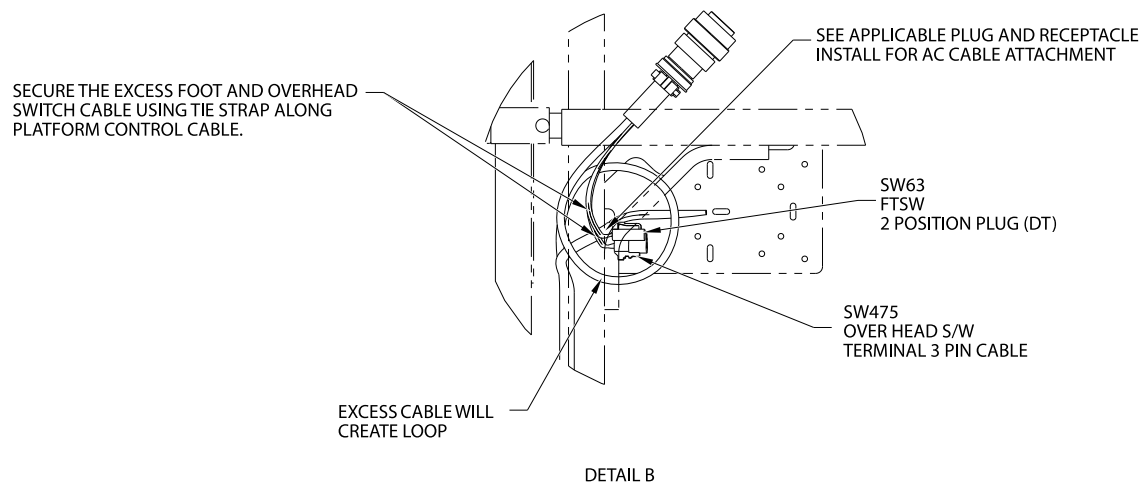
Scissor Arm Assembly - Cable Routing (Coil)
